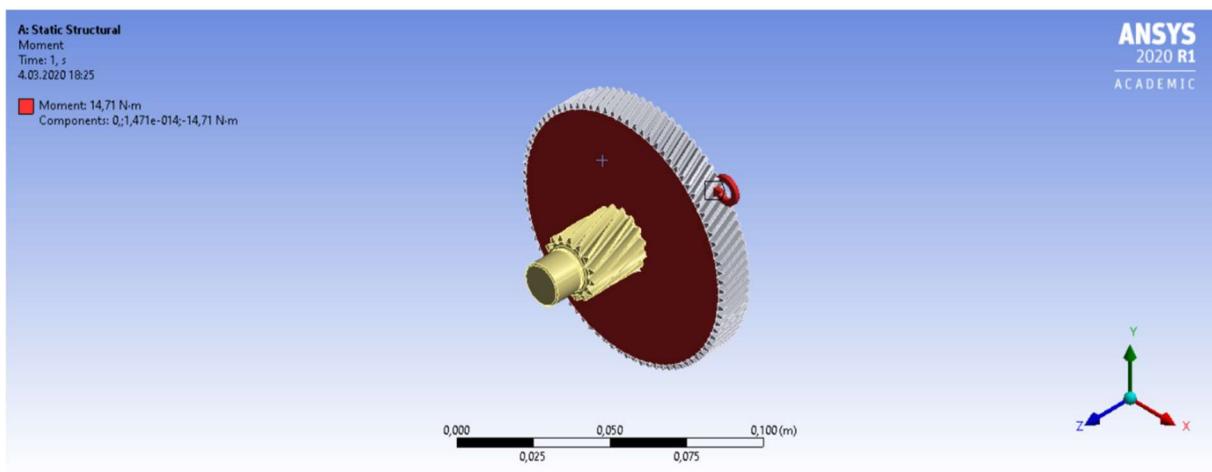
Z1 and Z2 gears (z2 fixed)
